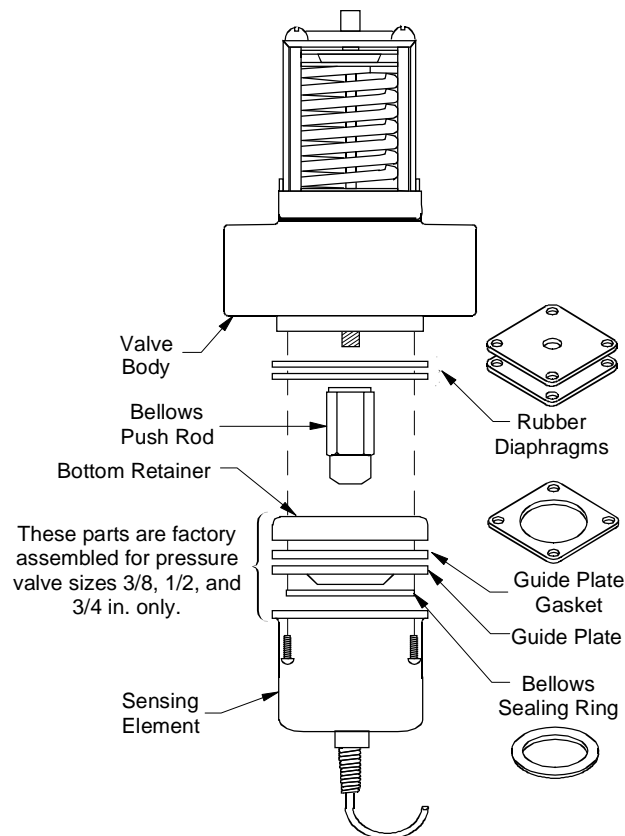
Guide Plate Gasket and Bellows Sealing Ring Identification
